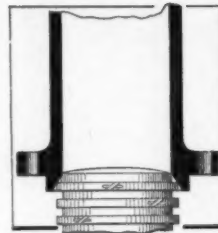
Section of a motor cylinder illustrating the beveling of the same so that the piston will enter without damaging the rings requiring their replacement by new rings
